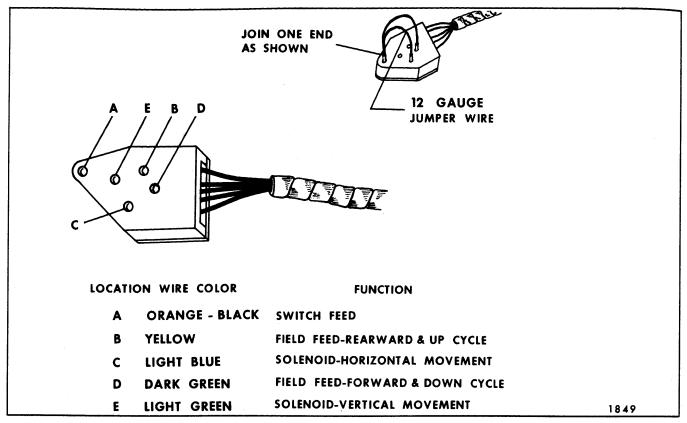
Four-Way Seat Switch Block - All Styles Except Oldsmobile "B & E"
